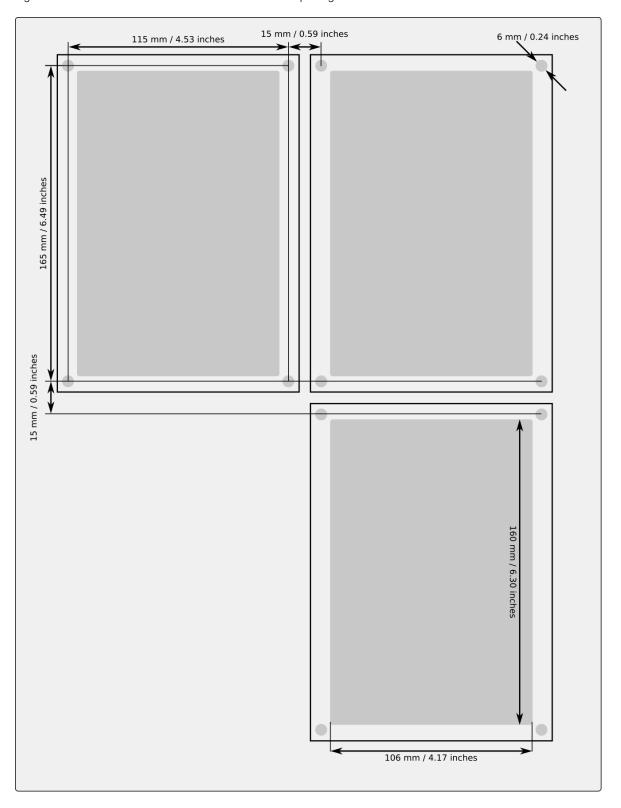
151. Panel cutout dimensions and device spacing.
